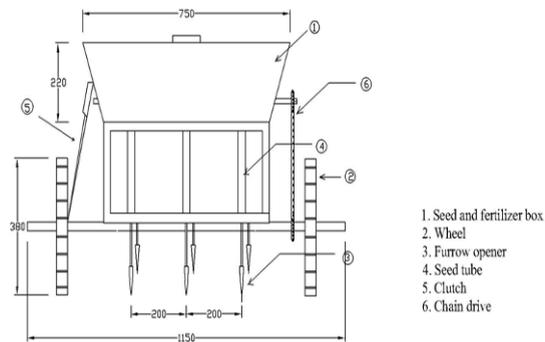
Front view of bullock drawn dry paddy seed cum fertilizer drill
